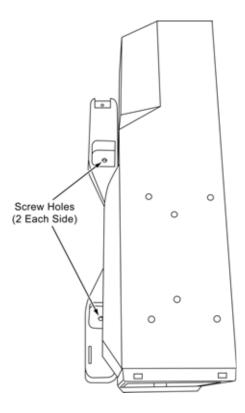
Secure the 9.5" Stand Mounting with Screws
